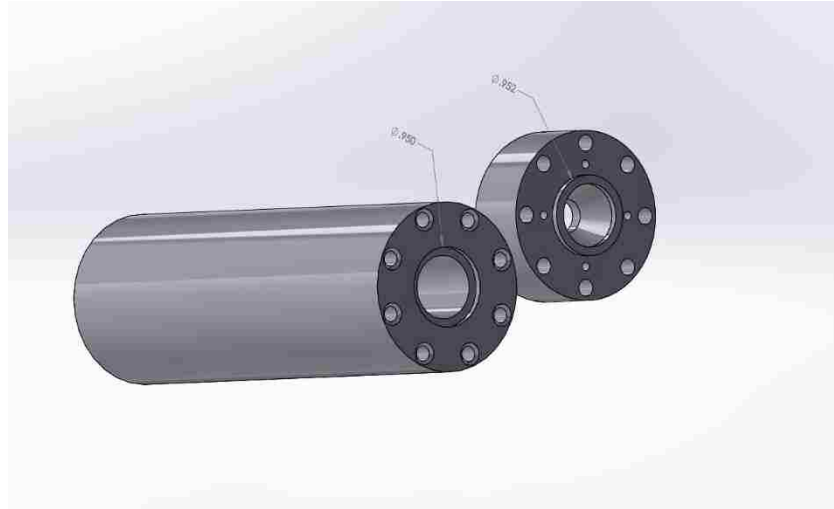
Bottom view of the barrel and top view of the nozzle mount.
